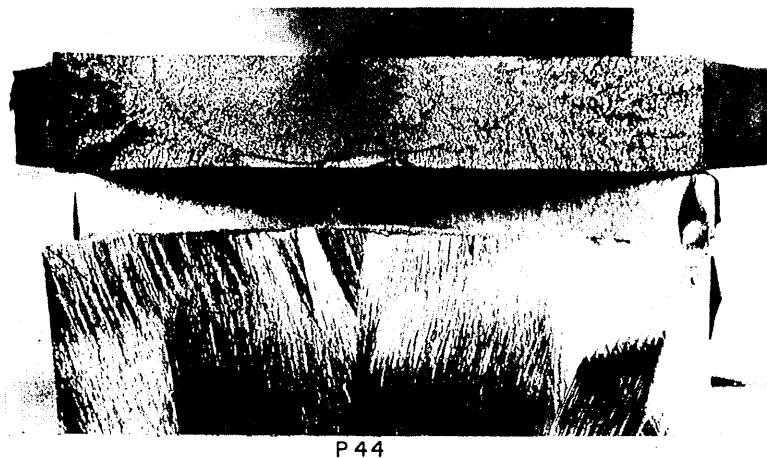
RESULTS OF FATIGUE TESTS OF TEE FILLET-WELDED JOINTS
